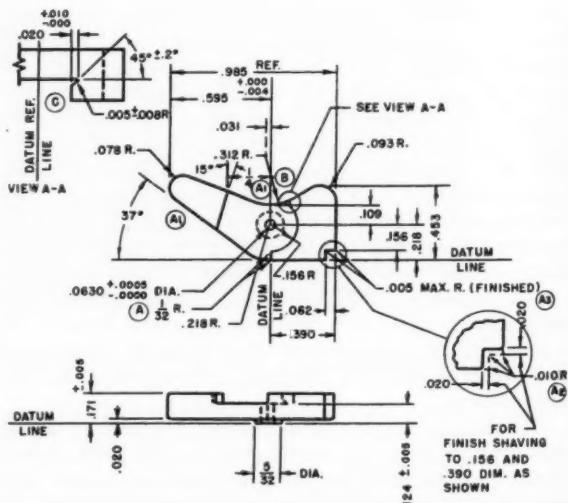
Tolerances allowed for the shutter-tripper flywheel
